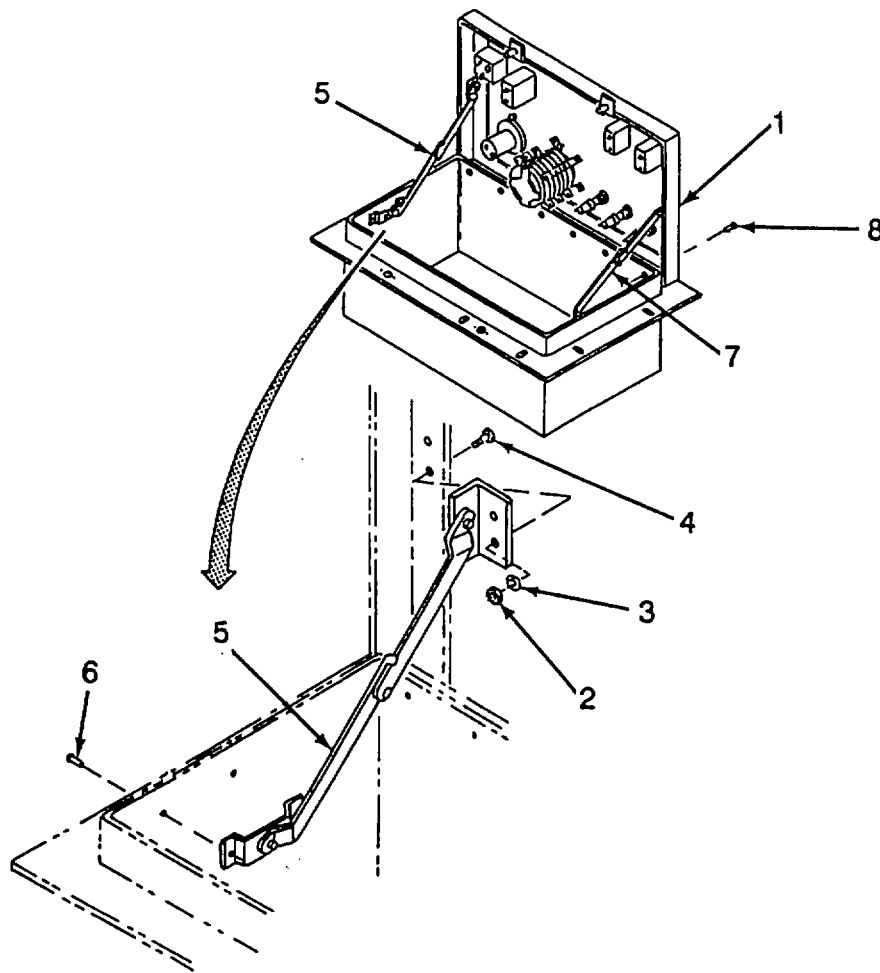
Control Box Disassembly (Sheet 1 of 2)
